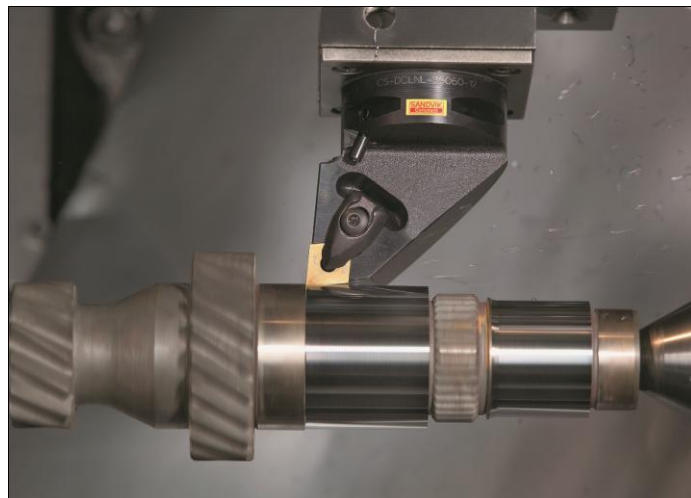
Hard turning of pinion shaft with the CBN insert. [fot. Sandvik Coromant]
